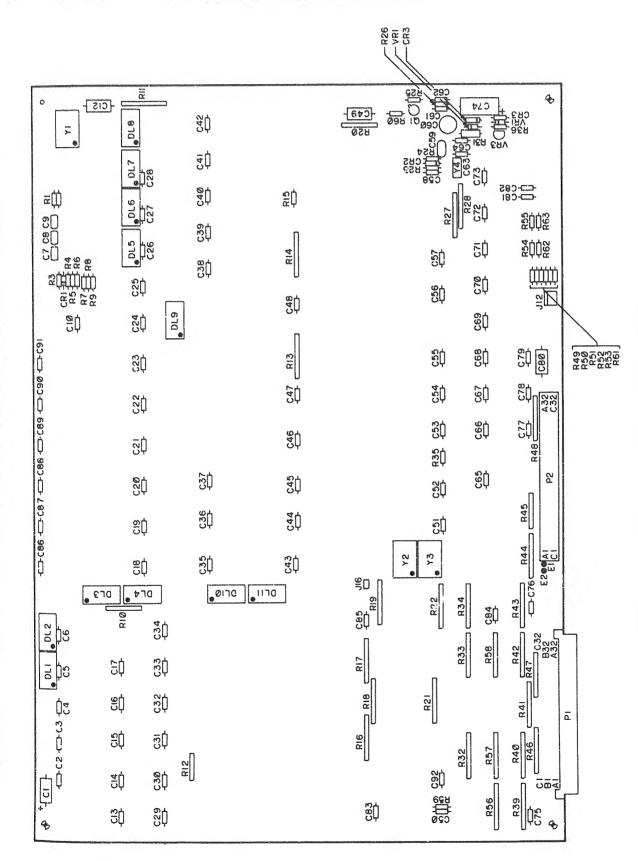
SCM Parts Location (sheer 2 of 2)
